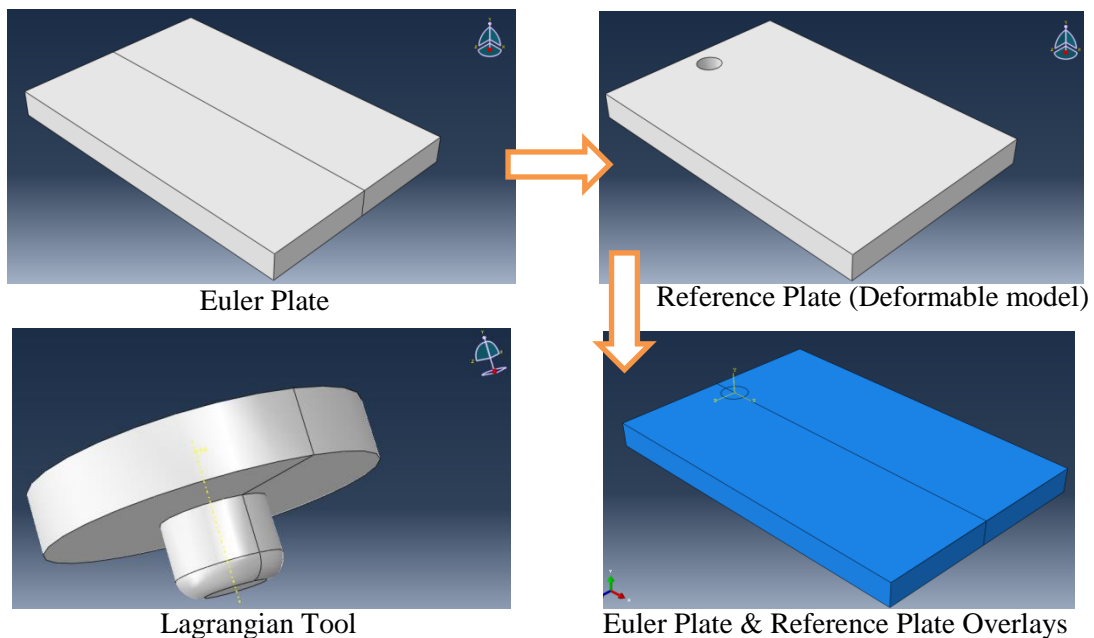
The Model of Euler Plate, Reference Plate & Tool
